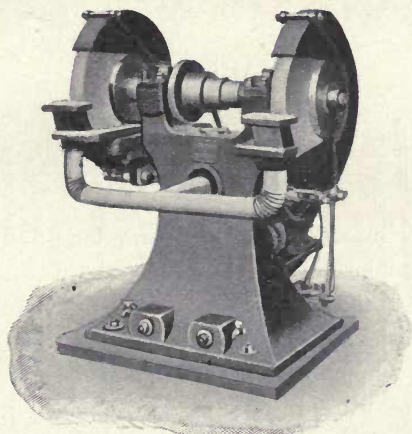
Naxos Union Dust Exhaustor. (Front View).
